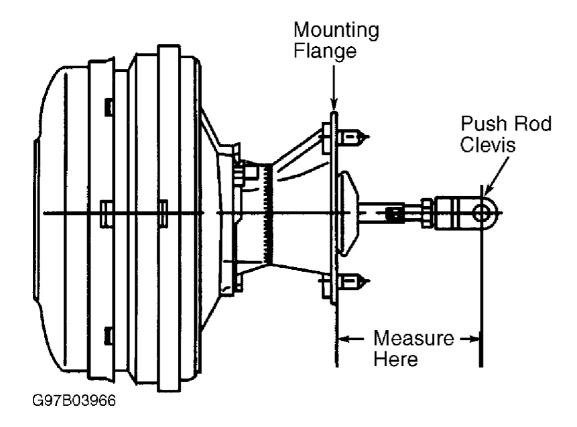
Measuring Power Brake Booster Push Rod Installed Length Courtesy of GENERAL MOTORS CORP.
